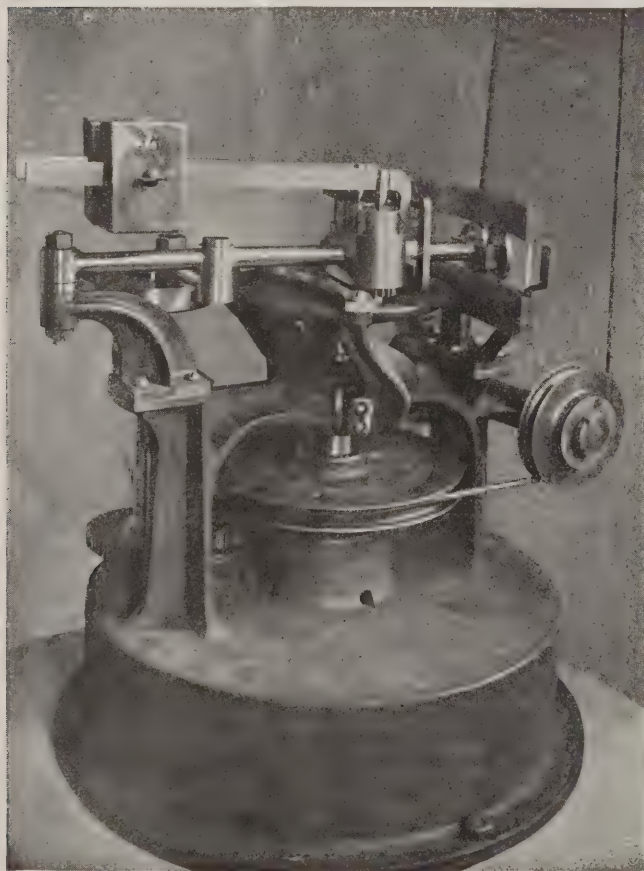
Machine used in S. K. F. laboratory for wear tests by direct grinding.
